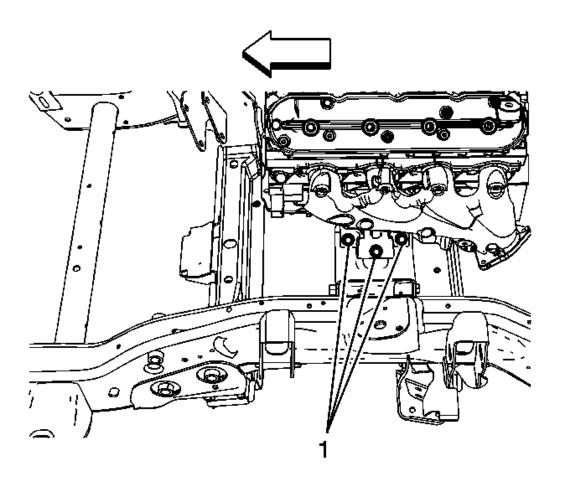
View Of Engine Mount Bracket Bolts Courtesy of GENERAL MOTORS CORP.
